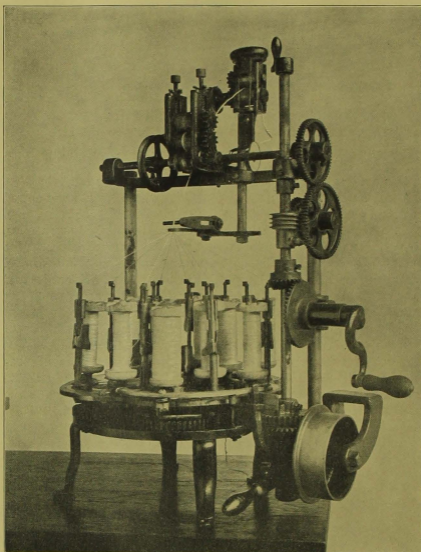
Plate XI. Thirteen-spool braiding machine of the New England Butt Company.
